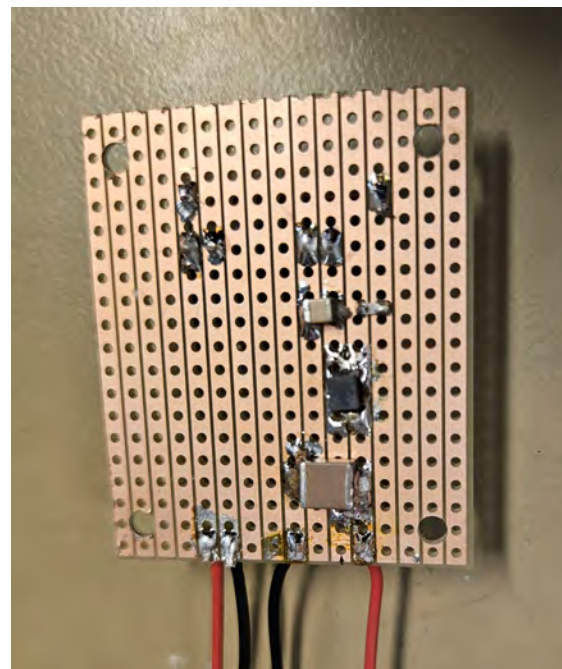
Bottom view of the isolated DC/DC converter circuit, showing the soldered filter components.
